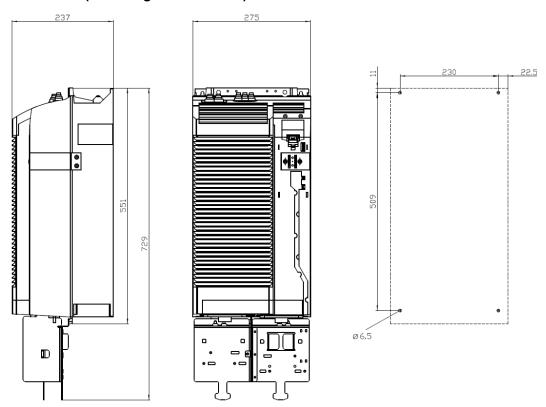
Dimension drawing, PM240-2 Power Module, frame size FSE (with integrated line filter); all dimensions in mm
